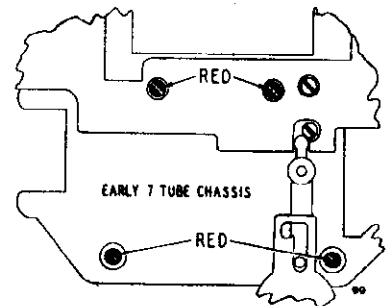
Location of 4 Red Mounting Screws in Early Models
